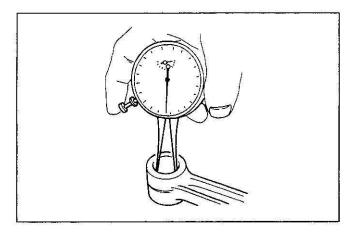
Measuring Piston Pin Bushing Inside Diameter
